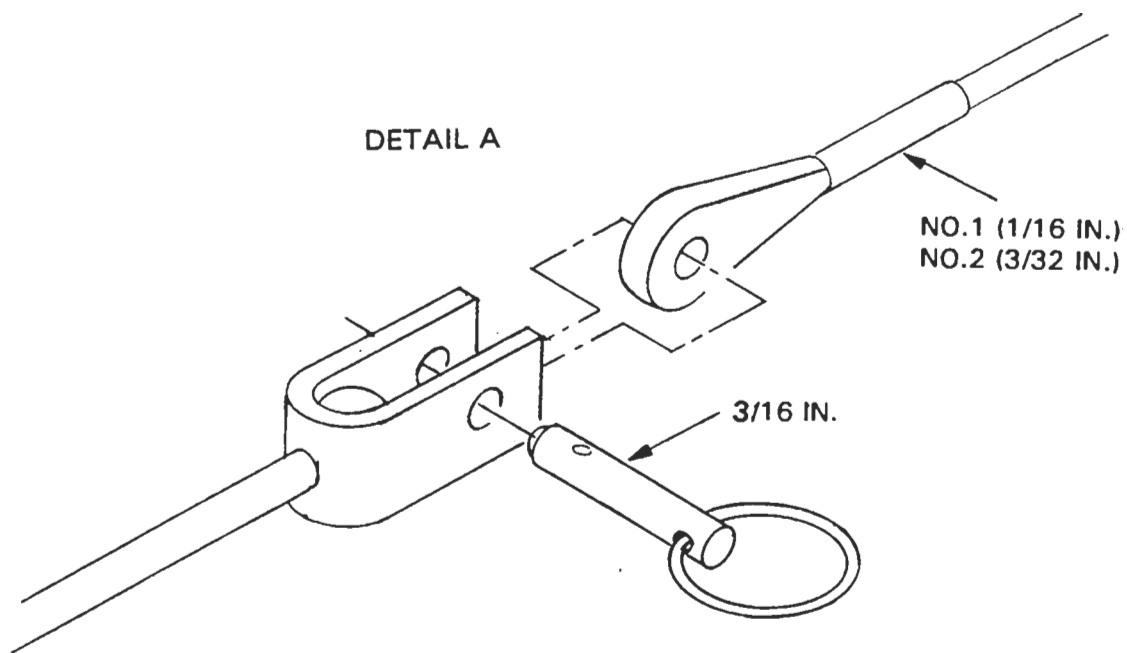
Cable Tensiometer Test Setup (Sheet 2)
